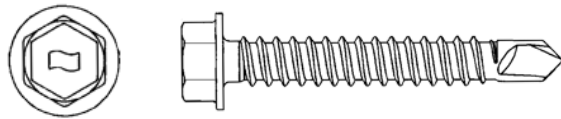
#12-14 INDENTED HEX WASHER HEAD TYPE 4 SCREW (TYPE 4A SIMILAR)
